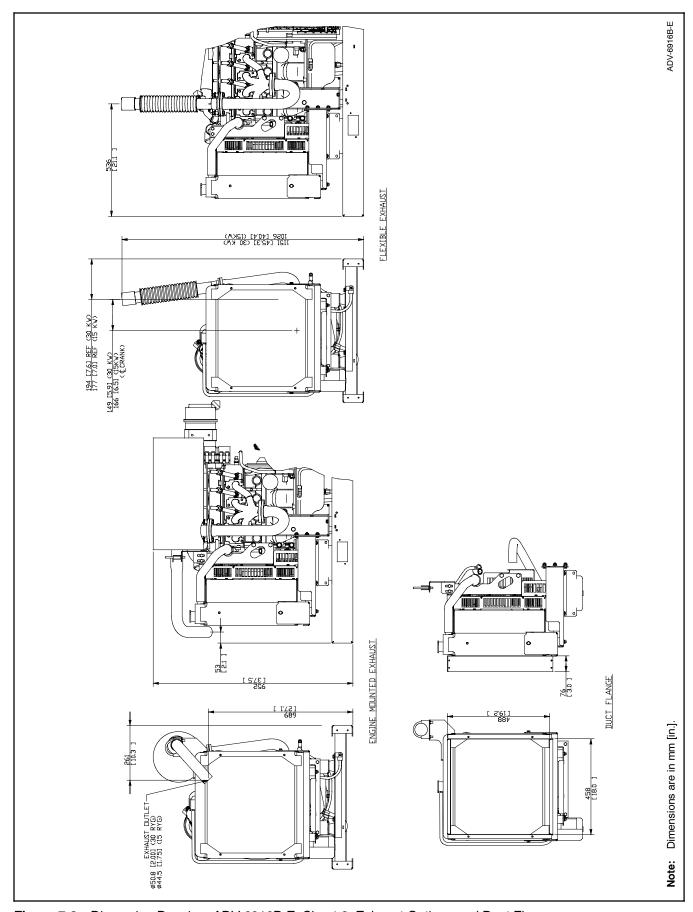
Dimension Drawing, ADV-6916B-E, Sheet 2, Exhaust Options and Duct Flange
